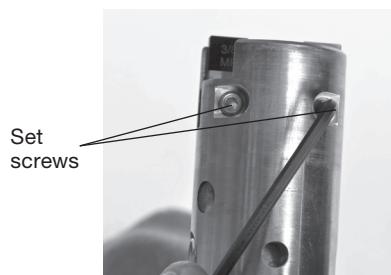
Loosening the #10 set screws (two other screws are on opposite side of housing)
